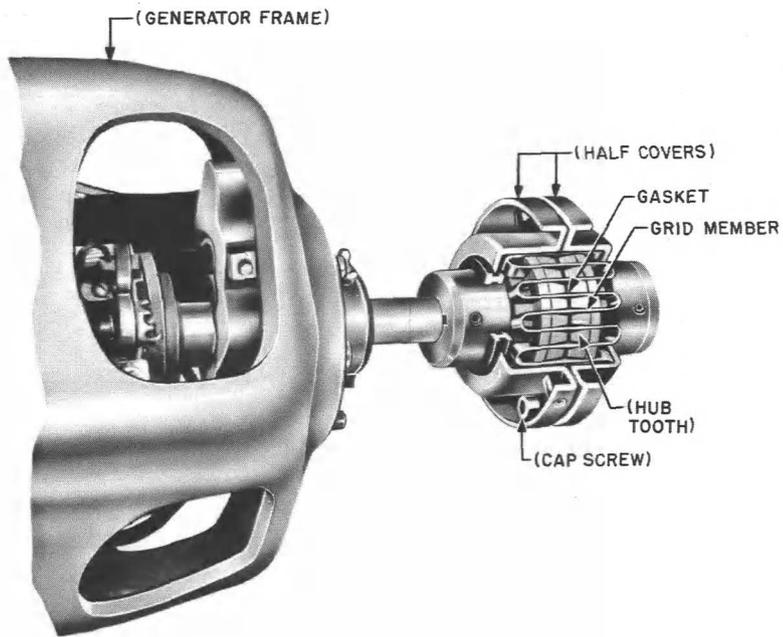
Detailed View of Falk Type F Coupling Assembly
